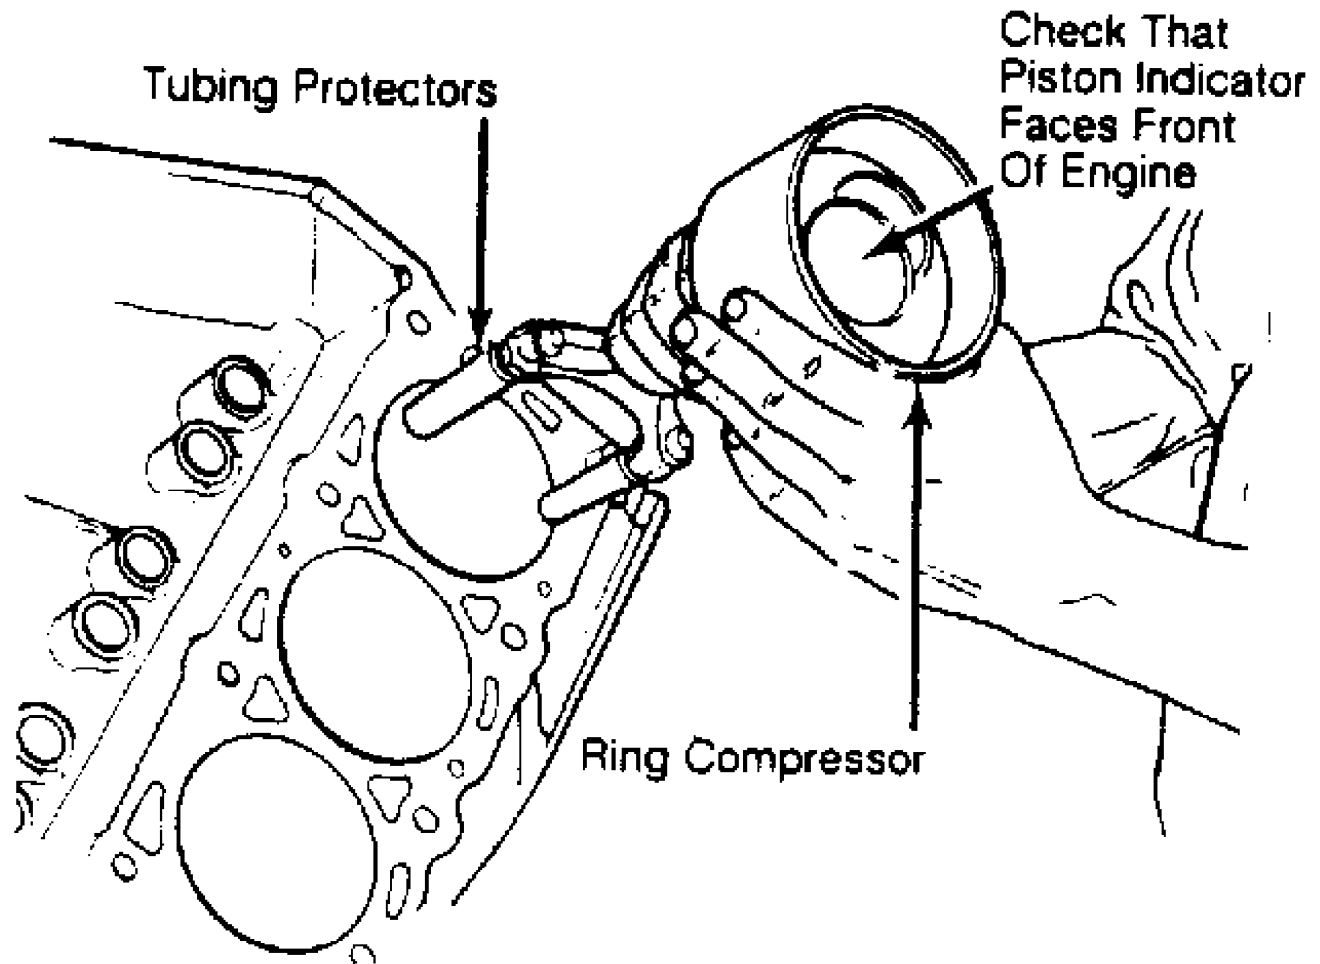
Installing Piston & Connecting Rod Assembly - Typical
